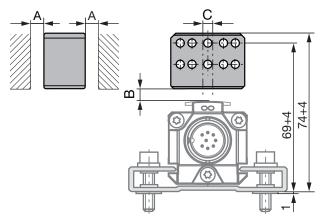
Dimensions and distances with BTL6-A-3800-2 magnet
